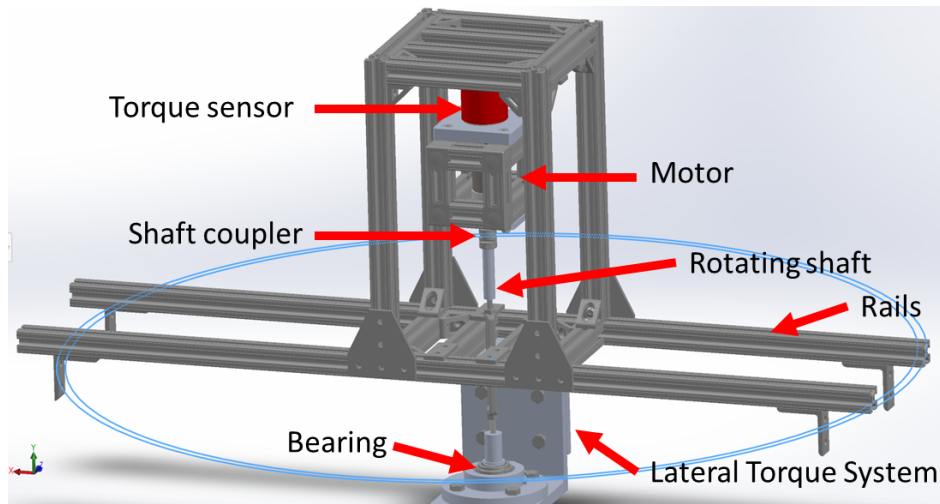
Bearing test stand design (left). Force is transmitted from the frame down through the torque sensor, motor, shaft coupler to the bearing itself
